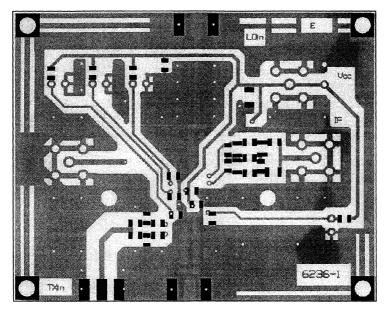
UAA2073XM Demo Board - Layer 2 Layout
